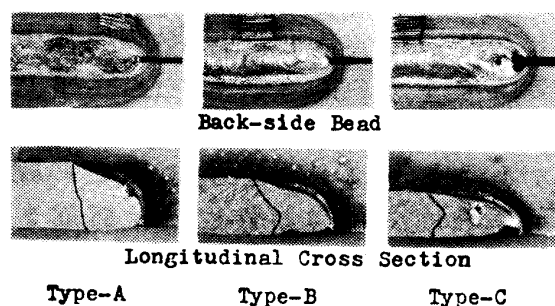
Classification of one-side welding beads under various welding conditions
